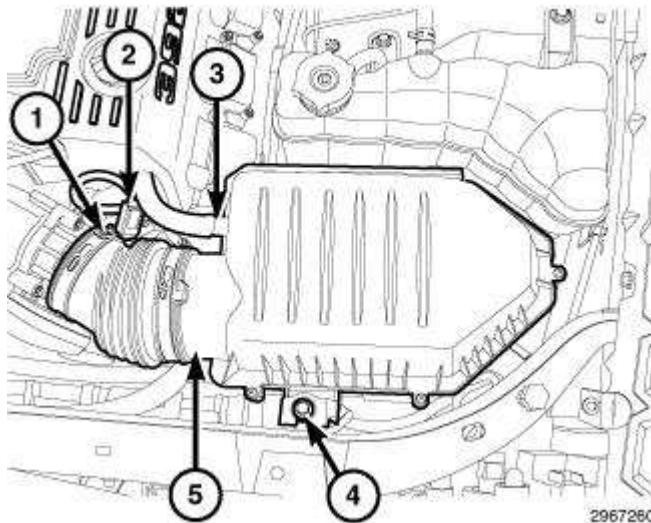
Air Duct Retaining Clamp, Intake Air Temperature Sensor Electrical Connector, Makeup Air Hose, Bolt & Air Cleaner Housing
